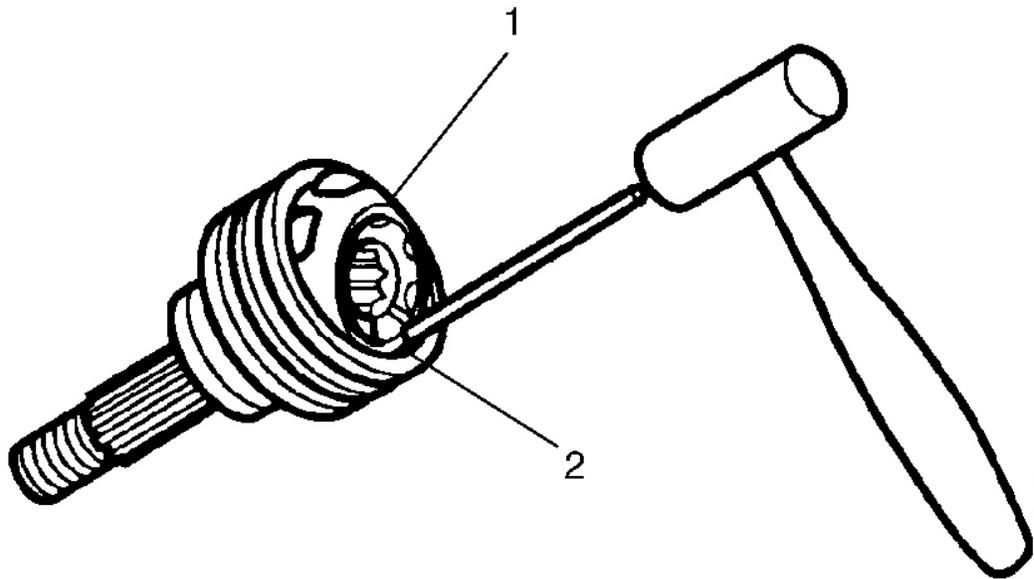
Using Hammer & Chisel To Disengage Outer Band From Inner Band
